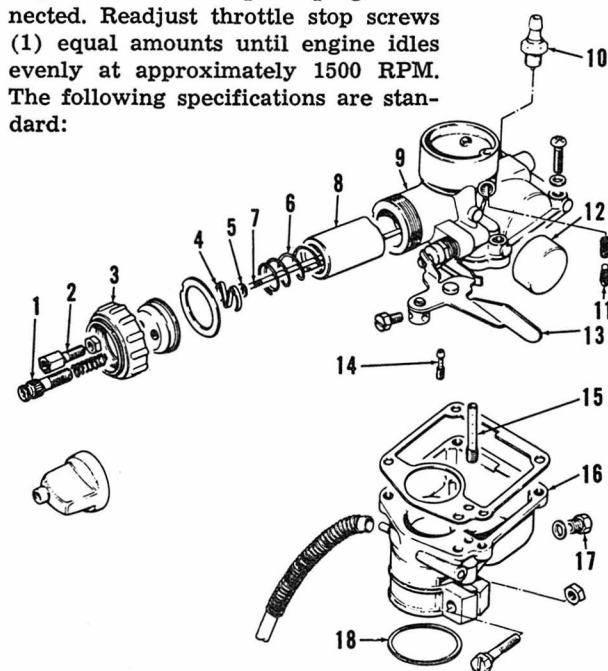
Exploded view of downdraft carburetor used on 125cc Suzuki twins.
